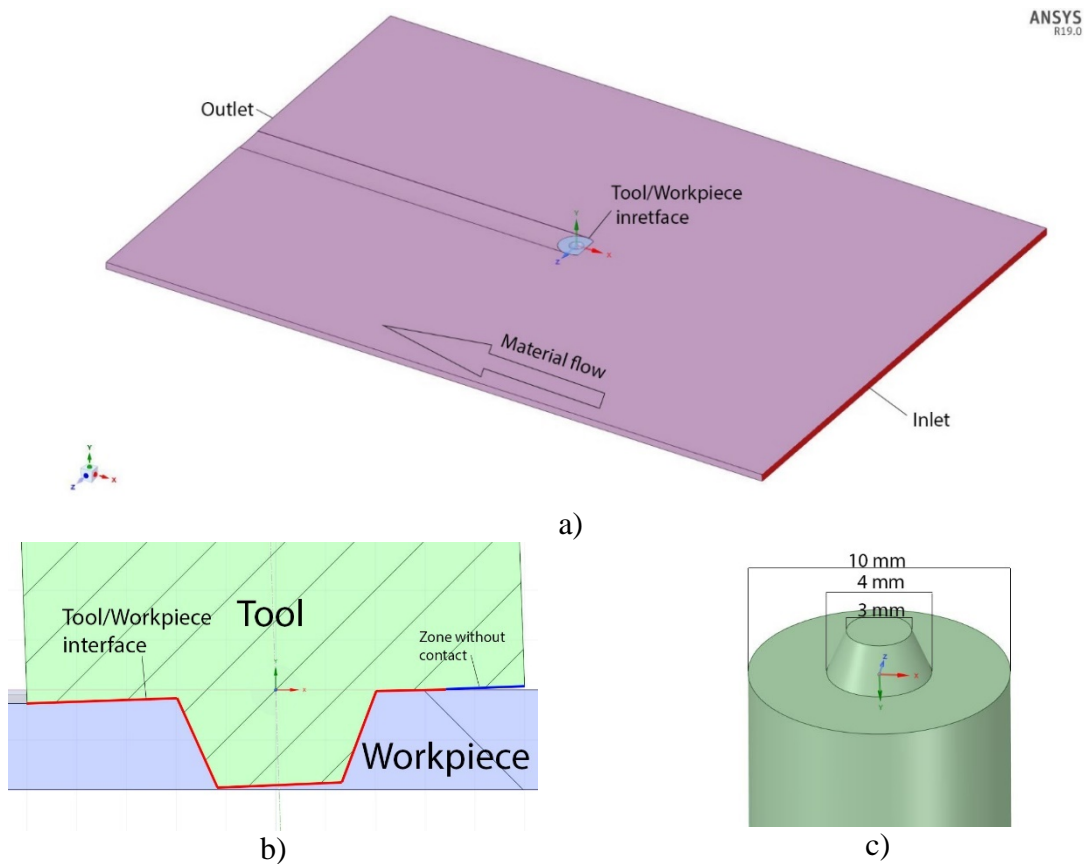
Scheme of the domain (a), tool position (b), tool geometry (c)
